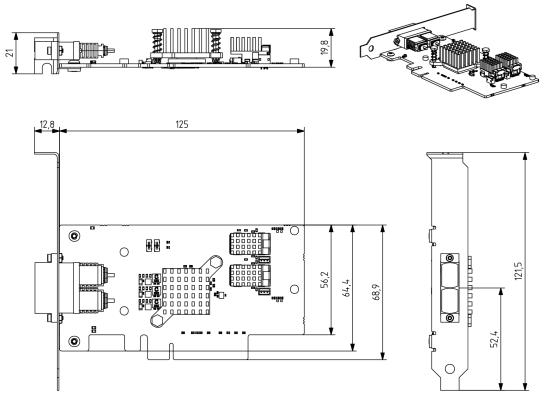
Dimensional drawing of host adapter HA-2P-X4G3-MTP-X8G3
